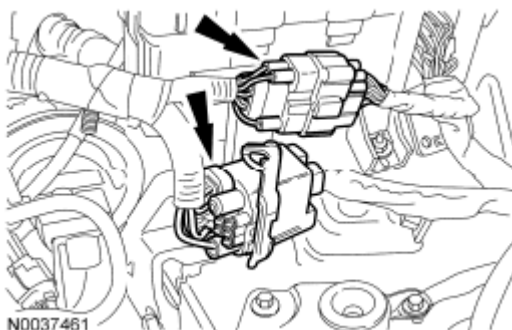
Locating Engine Wiring Harness Electrical Connectors
